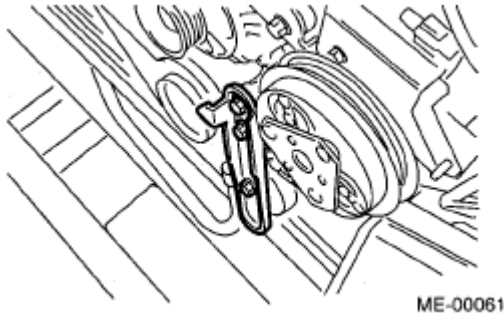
Identifying Rear Side Belt And Belt Tensioner
